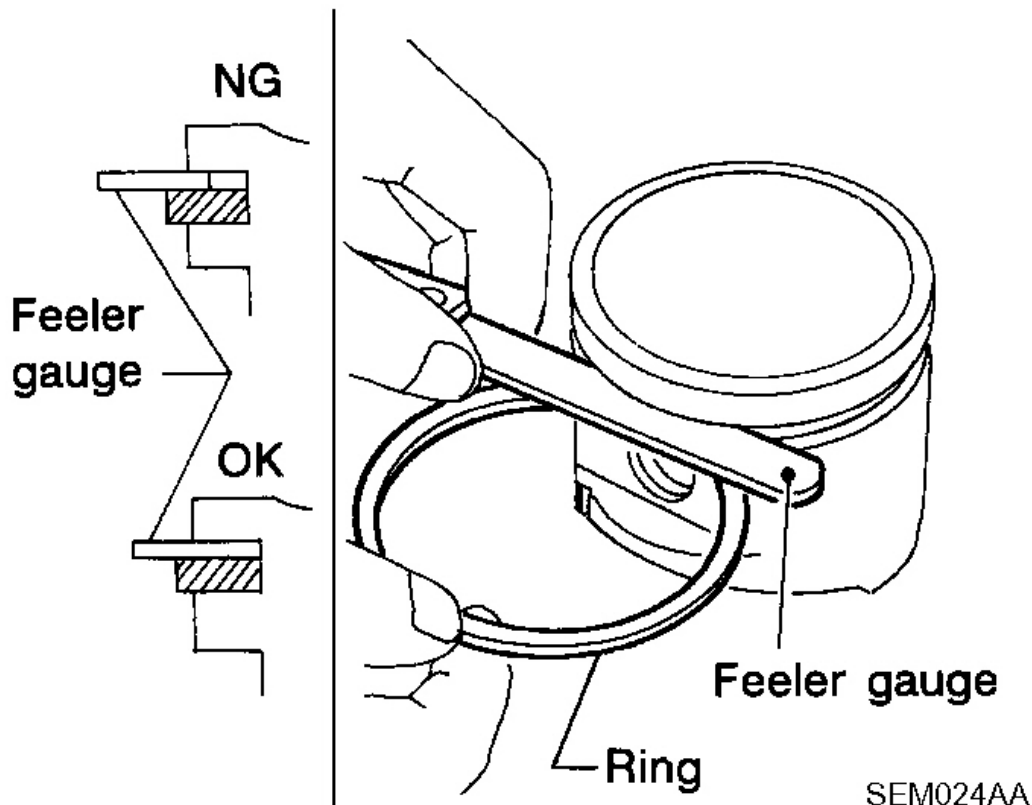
Measuring Side Clearance Of Piston Ring And Piston Ring Groove With Feeler Gauge
